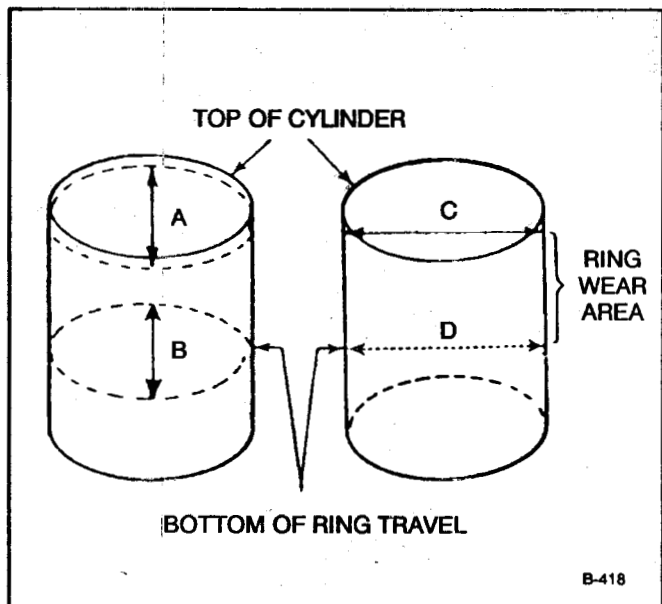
METHODS OF MEASURING THE DIAMETER OF A CYLINDER BORE
